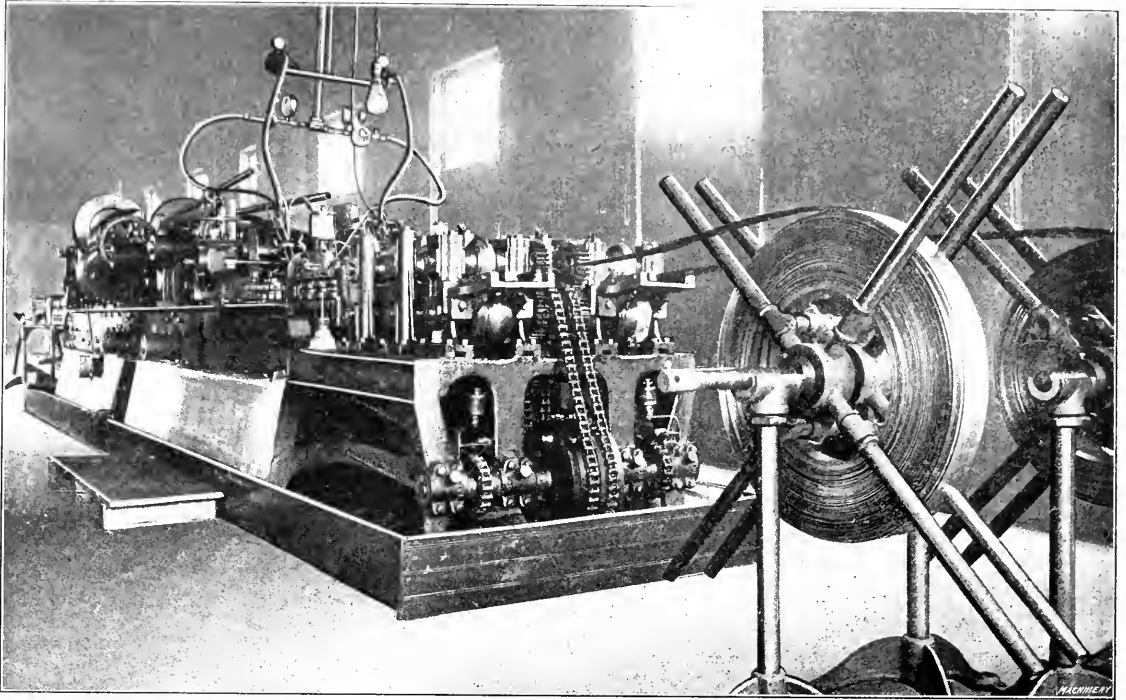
Front View of Lloyd Machine for making "Welded Seamless" Tubing showing Delivery of Stock to the Machine
